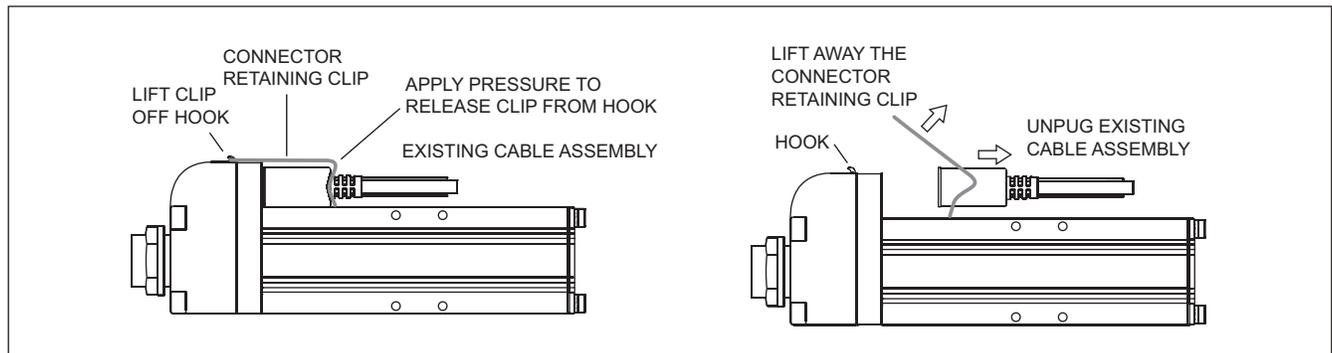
(left) Removing the retaining clip and (right) removing the cable assembly.
